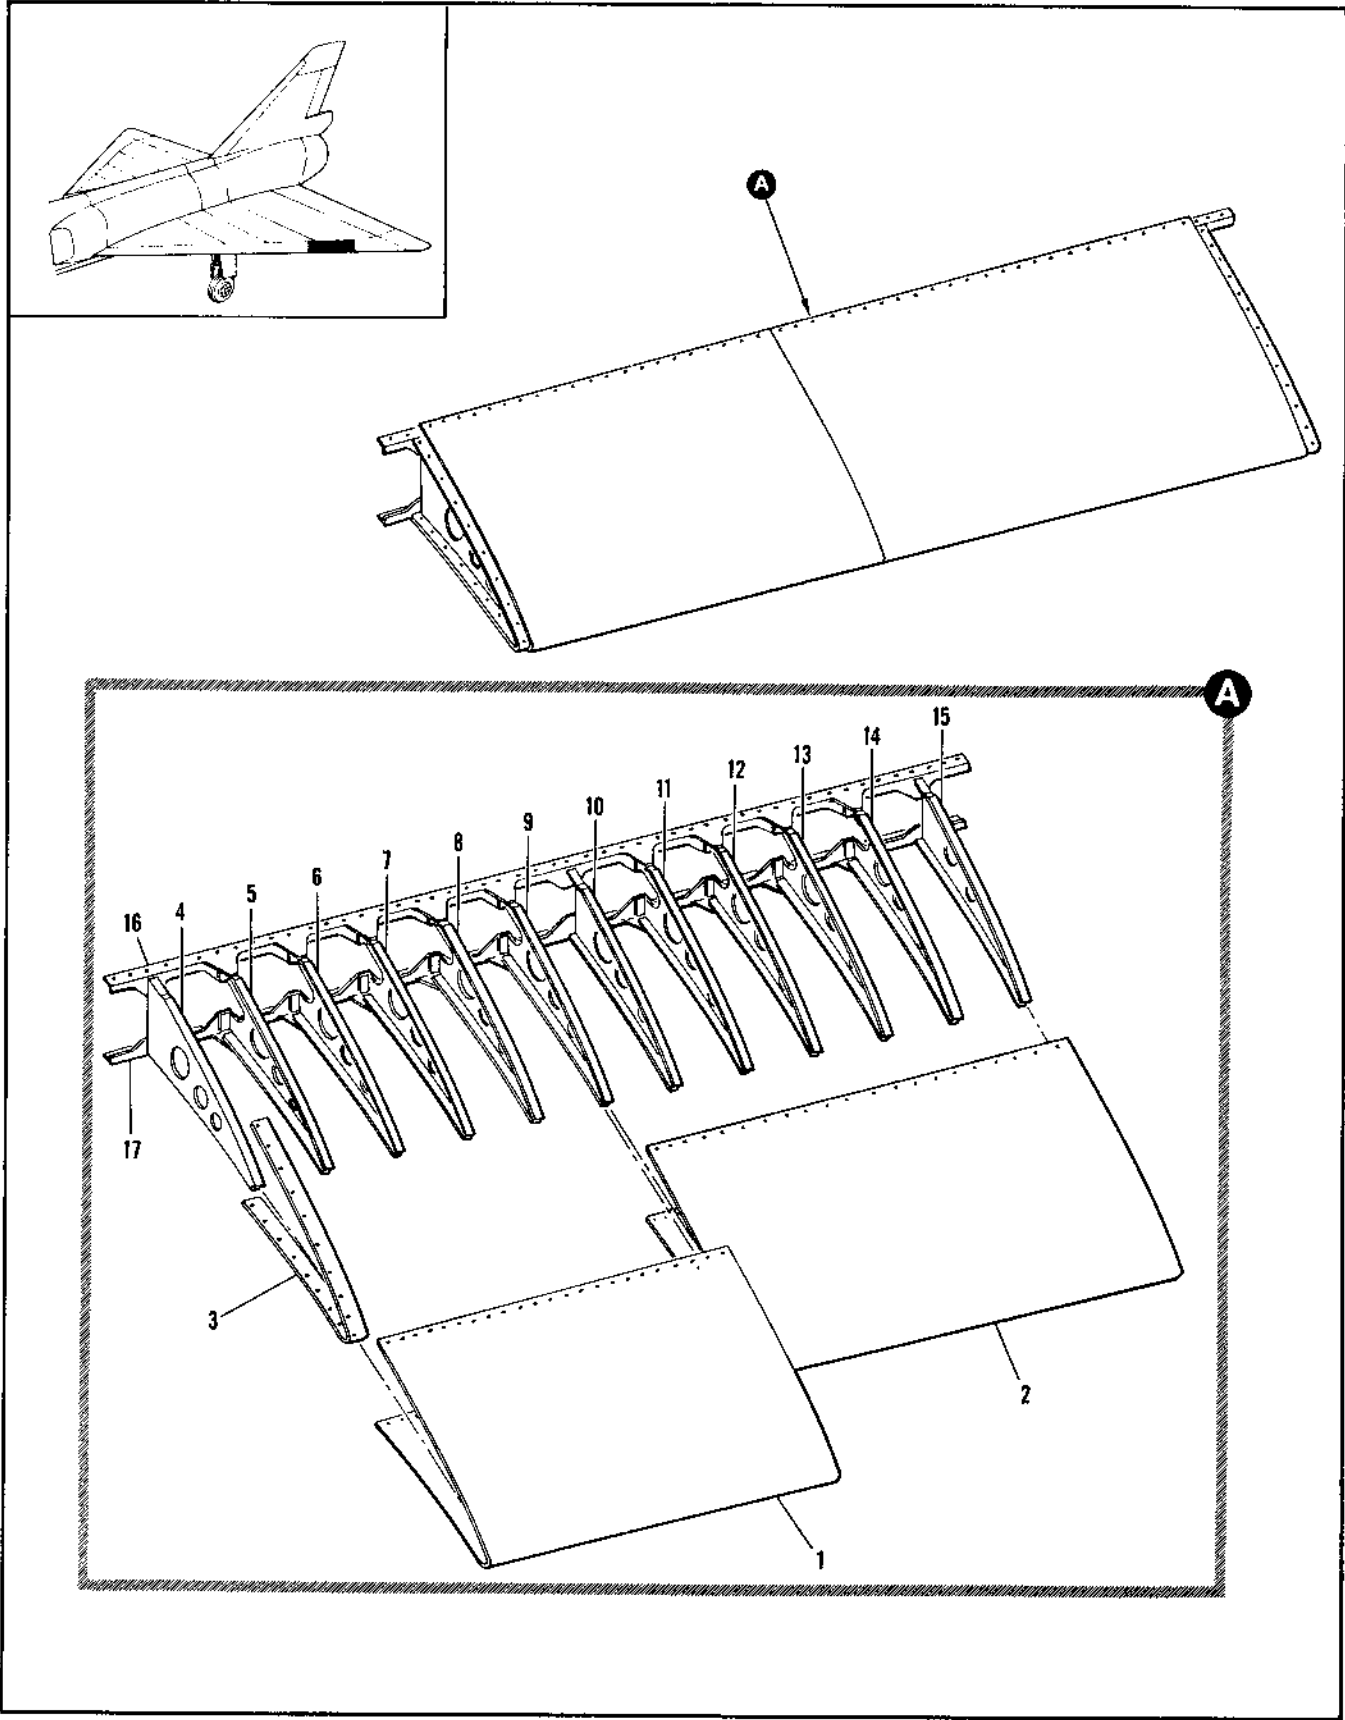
Wing Leading Edge Assembly Sta 338 to 384
